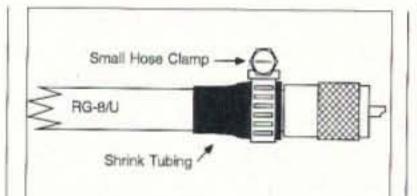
WB9YBM's completed termination, shown with the stainless steel hose clamp in place over the connector's rear sleeve area.
